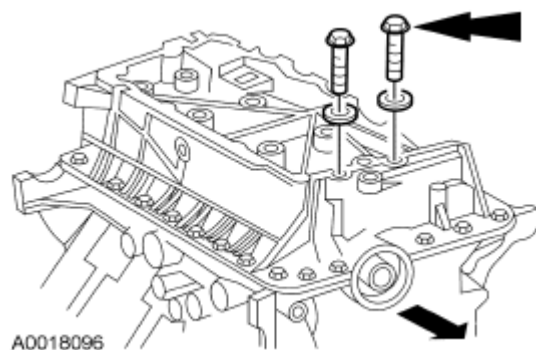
Locating Silver-Colored Bolts And New Washer Seals
